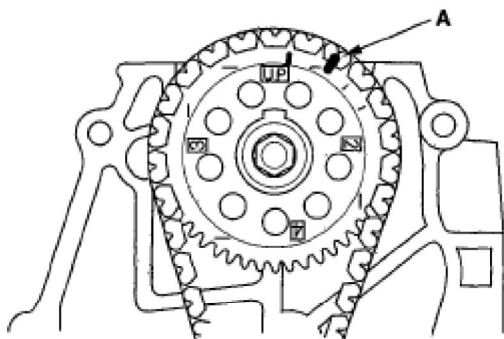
Locating Reference Mark Across Camshaft Sprocket & Cam Chain
